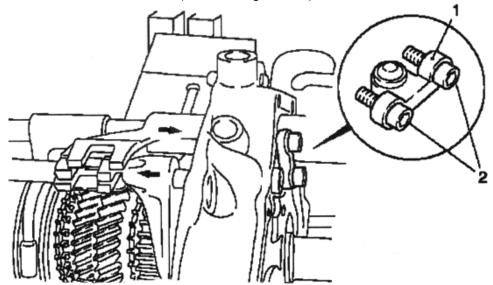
Disconnecting ISO-ta clamping bolt back cover:
